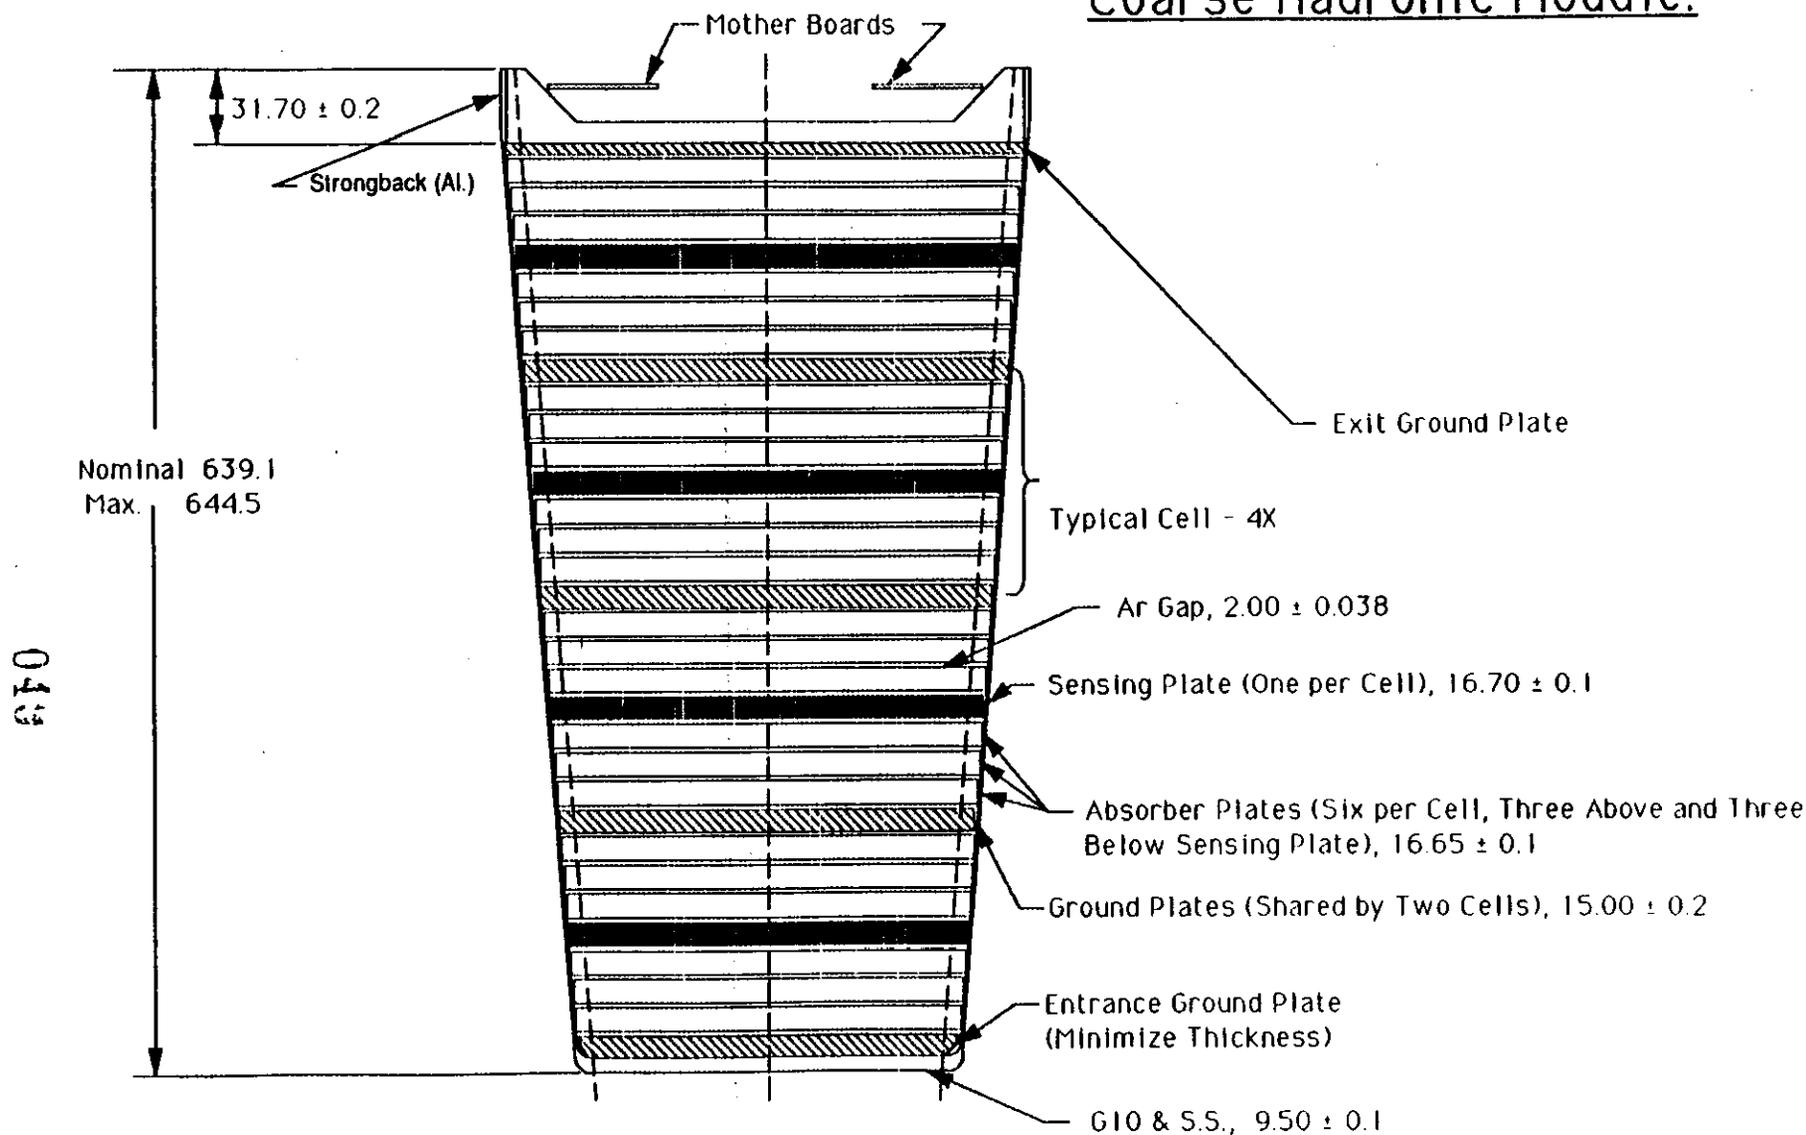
Coarse Hadron Module Showing Stack Height and Element Tolerances
